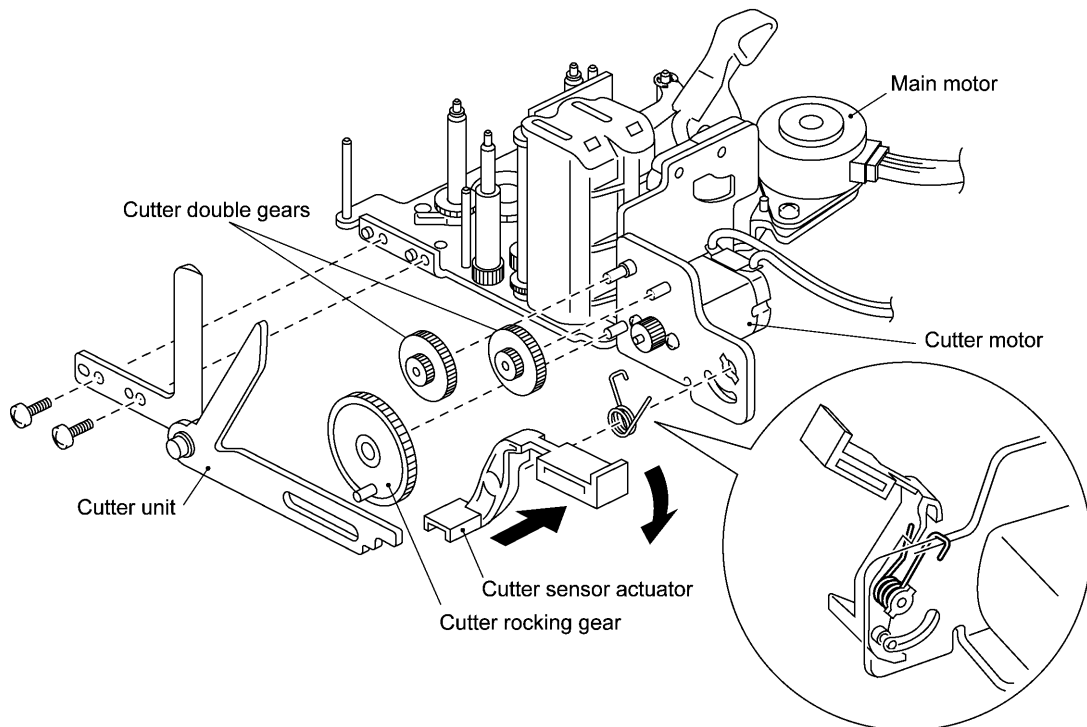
Installing the Cutter Unit and its Related Parts
